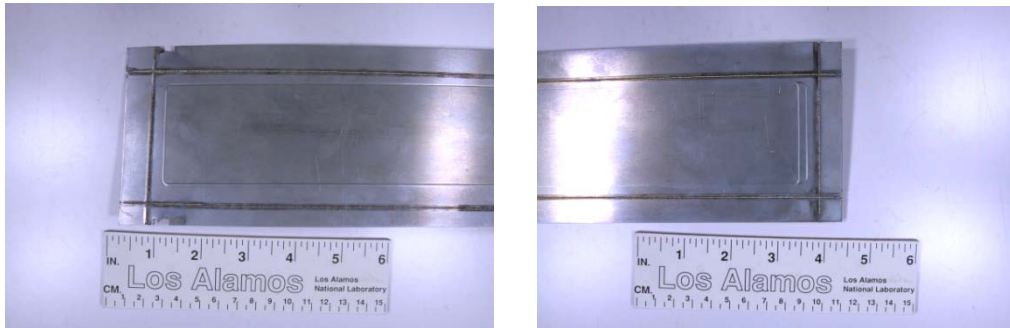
Post HIP foil assemblies showing a) outline of encased stainless steel foil and b) indication that stainless steel foil slipped out of pocket.
